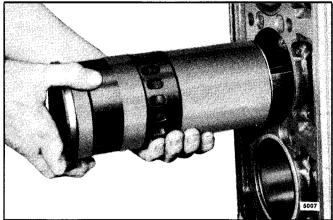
Installing Piston, Rod and Liner Assembly in Cylinder Block
